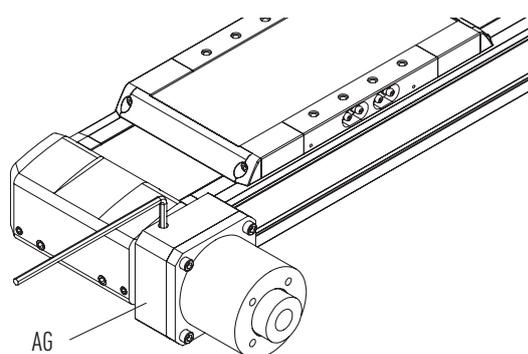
Tightening the clamping hub on the gear shaft
